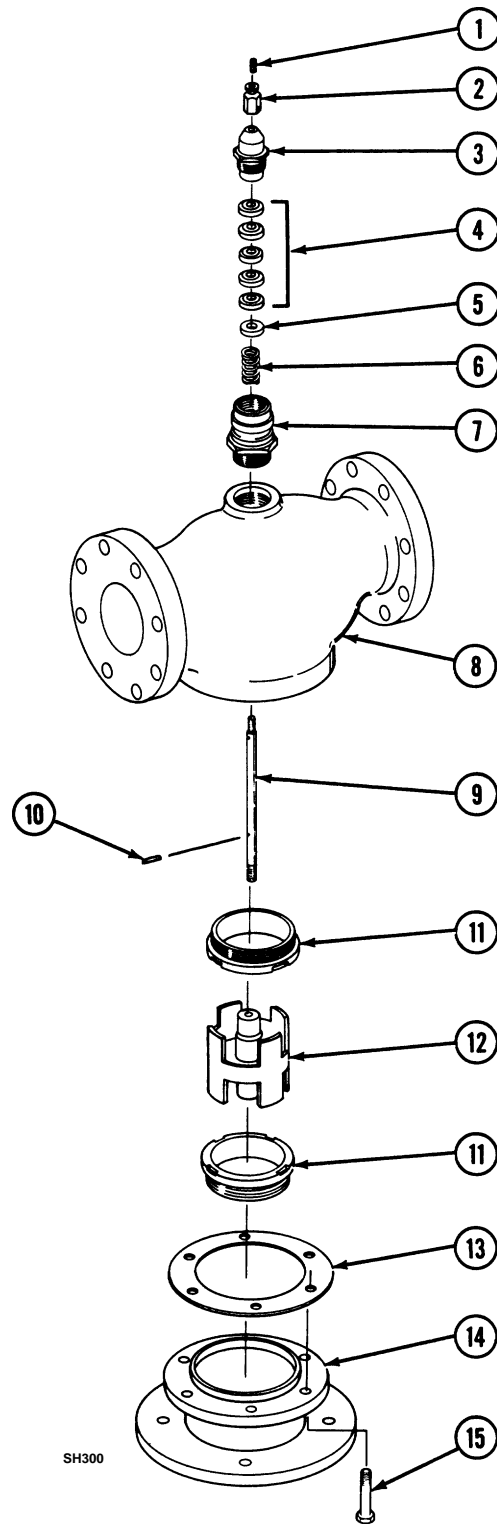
V5013A Three-Way Flanged Body Valves—Exploded View.
